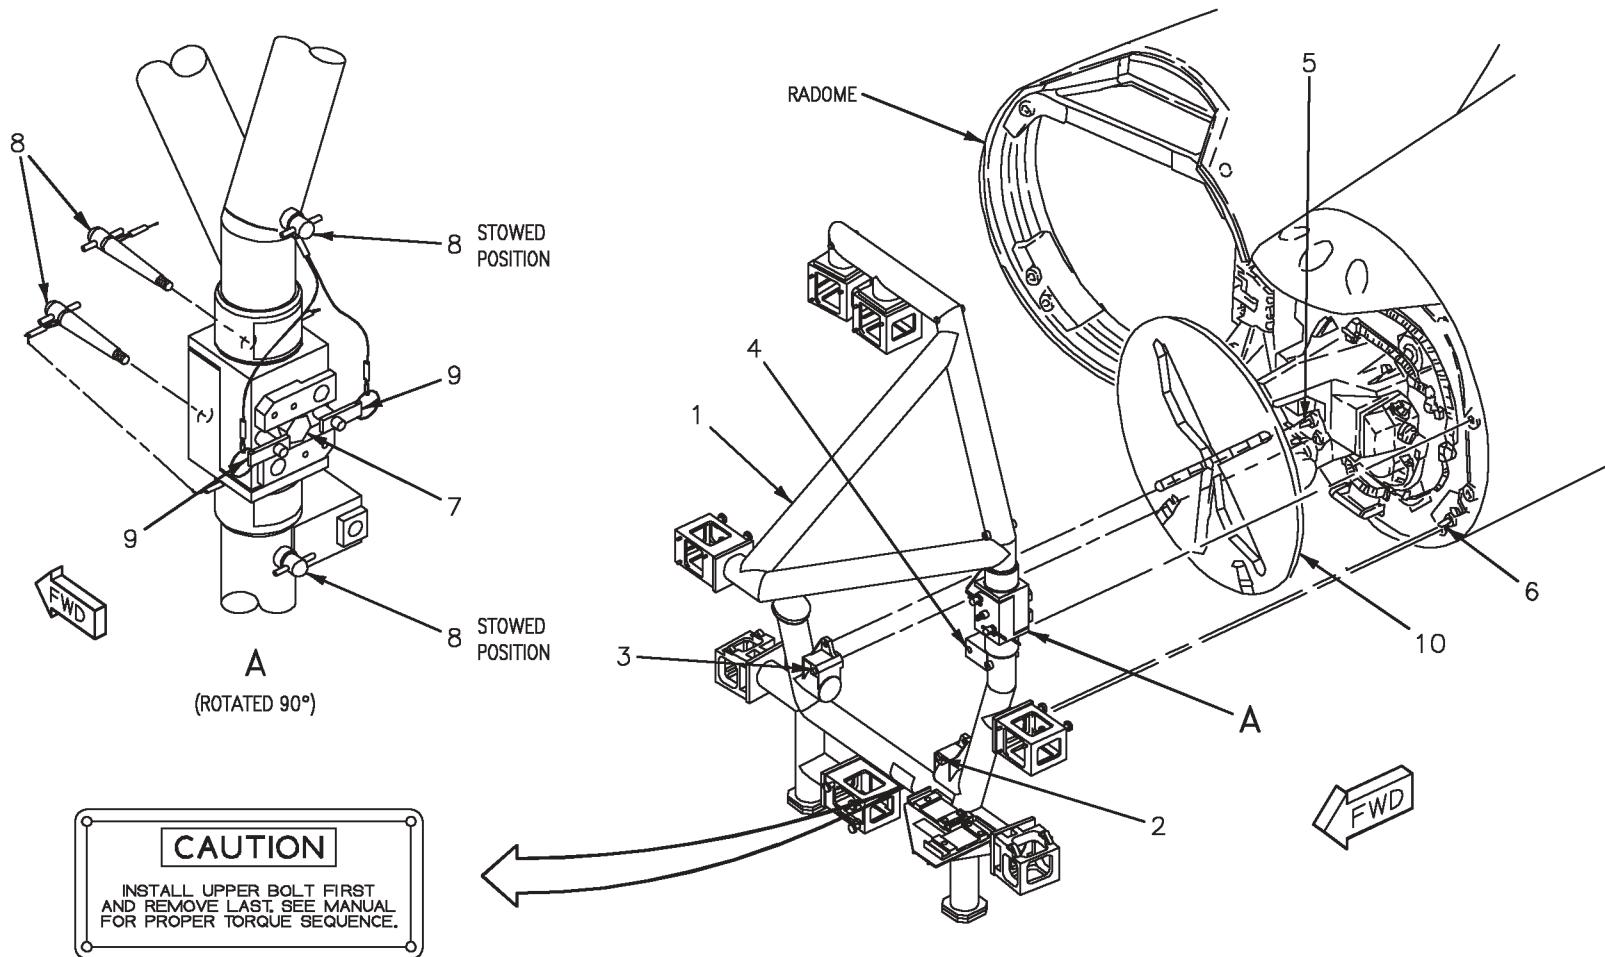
BRFA, Removal and Stowage (Sheet 1)
